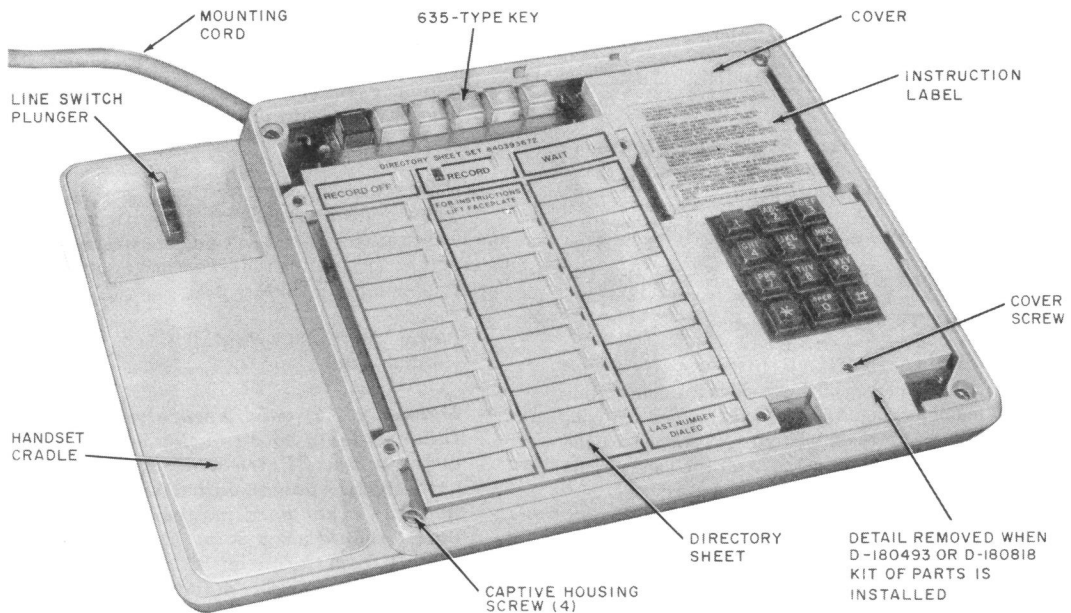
2872A2M Telephone Set, Faceplate and Handset Removed
